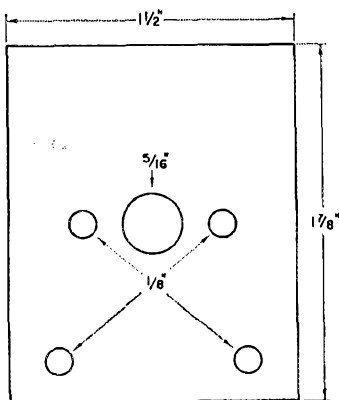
Template of insulated plate for  $C_1$  mounting.
